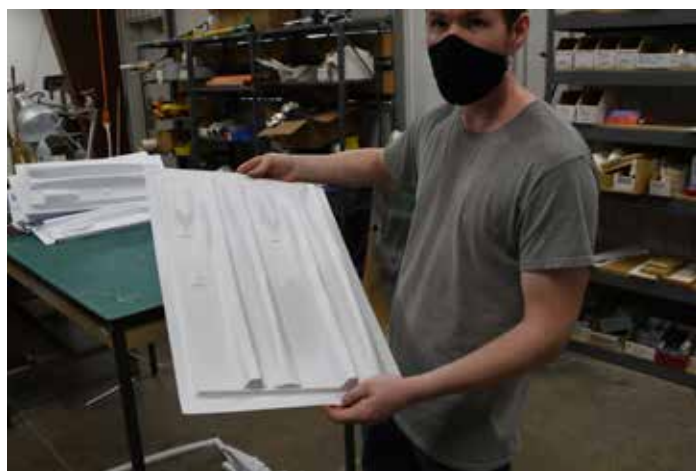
West shows off a vacuum form sheet for the X-15 rocket kit. This is step 21, where the parts are produced.
